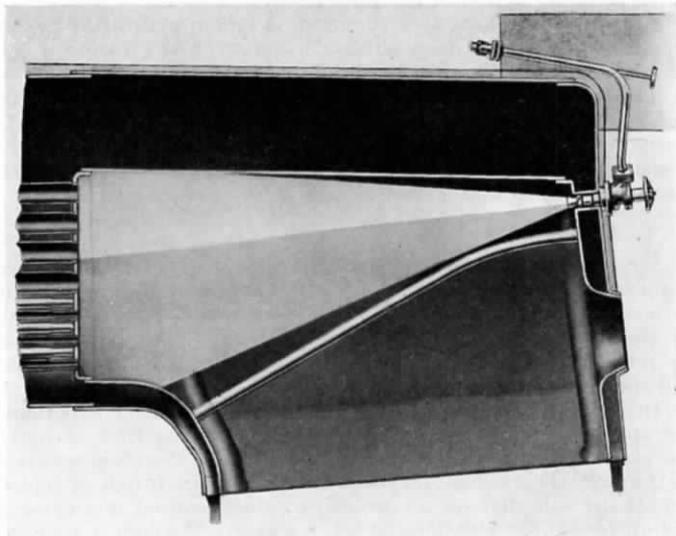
SECTIONAL VIEW OF A FIREBOX FITTED WITH CLYDE SOOT BLOWER ON THE BACK PLATE.
